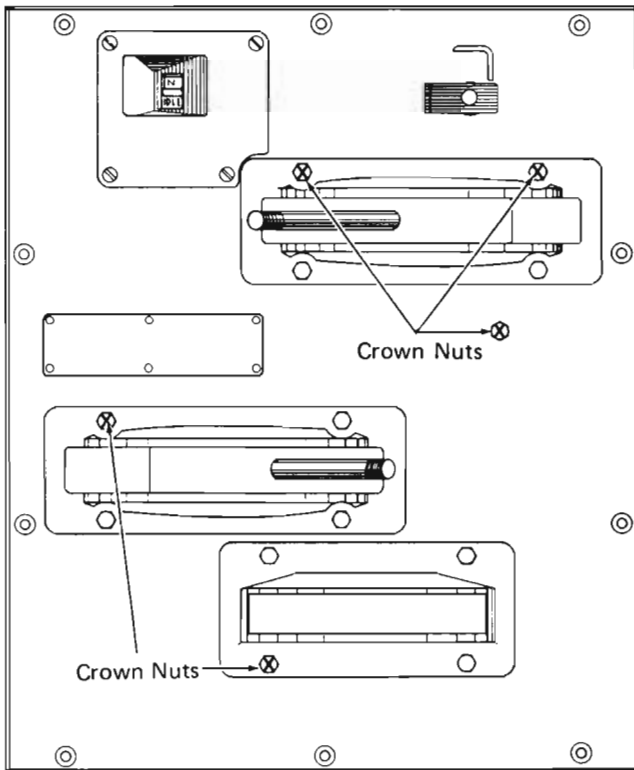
Removal Of Controller Front Mounting Plate (Locknut Device On GT26MC Only)
